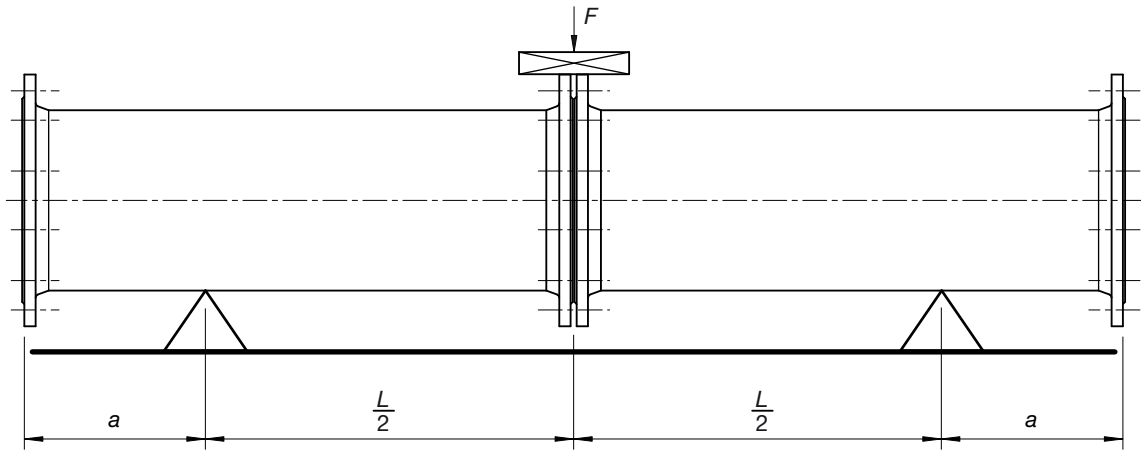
TYPICAL TEST ASSEMBLY ARRANGEMENT
